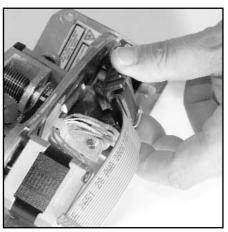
Non-Plug-Side Transport Belt Drive Assembly Removal
